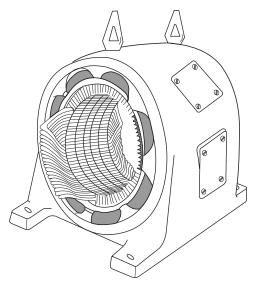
Induction motor stator shown partially would double-layer winding
